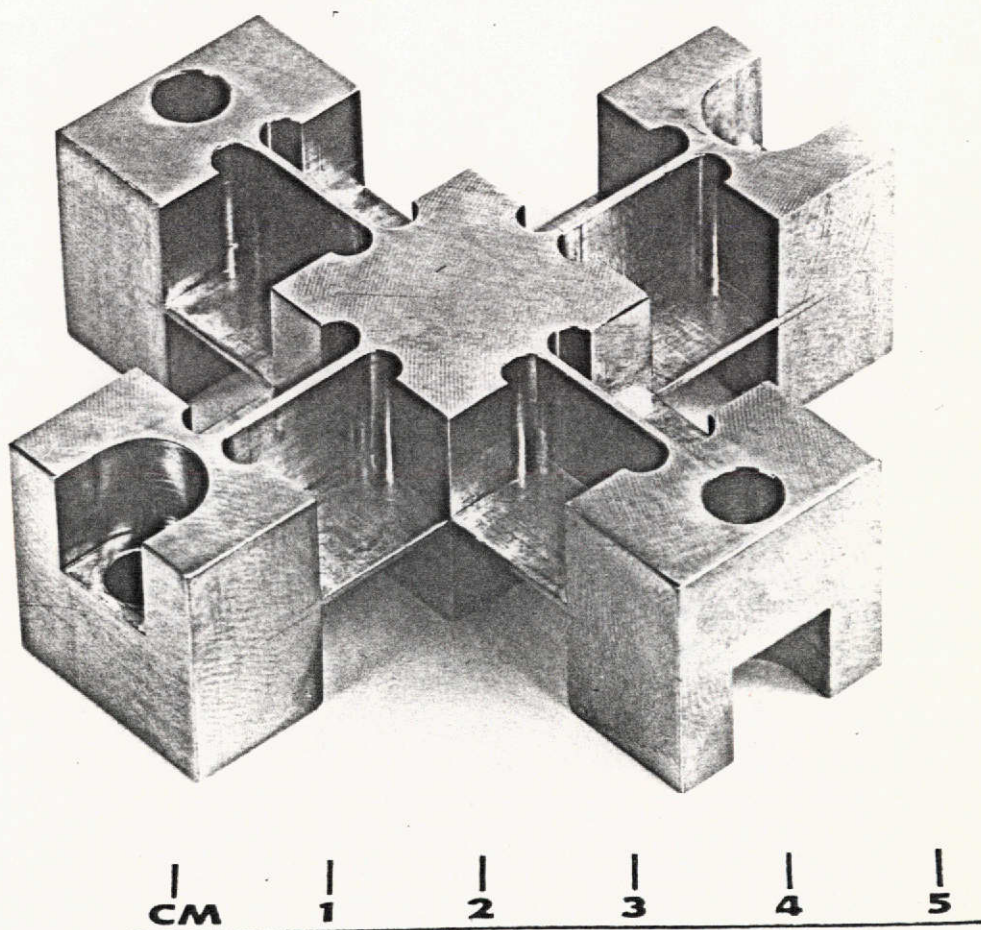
Two-Axis Cruciform Flexure (Sheet 2 of 2)
